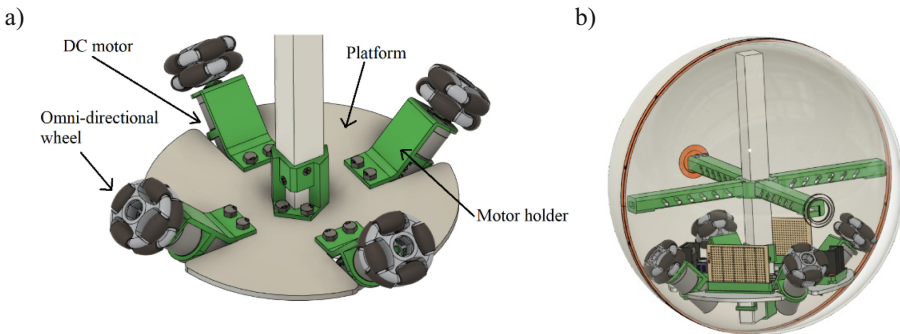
a) view of the inner platform of the robot, b) view of the whole robot ball.
